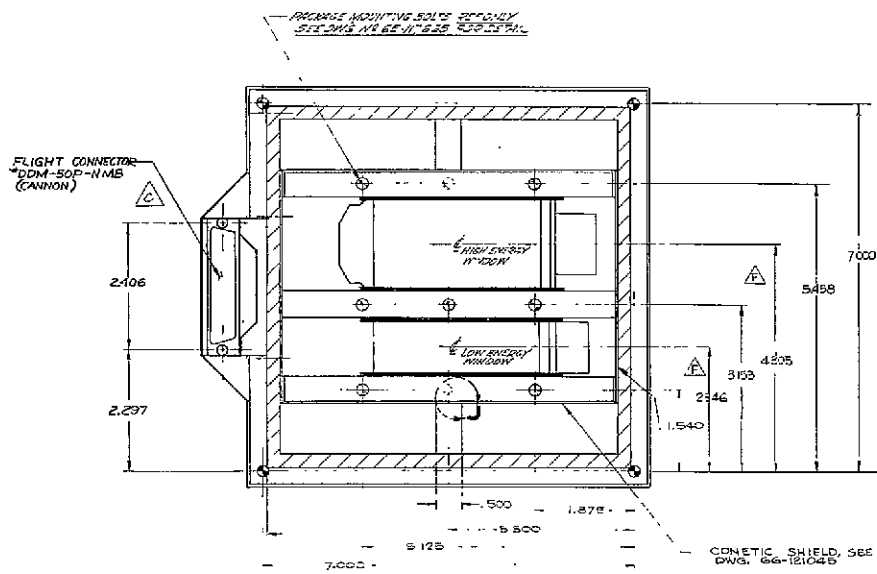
Mechanical layout of OPEP package (sheet 1 of 2).
